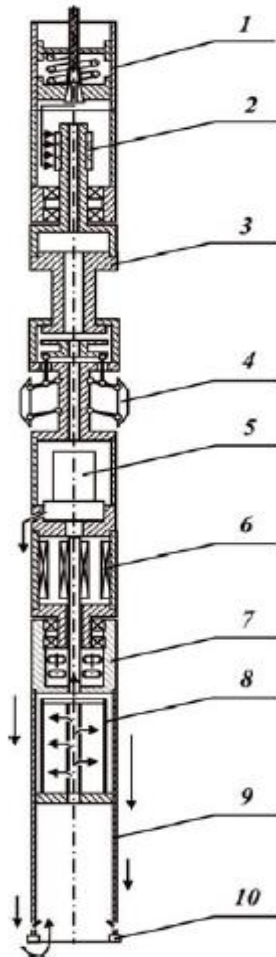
KEMS-112 Electromechanical Drill. 1: Cable termination 2: Electric chamber 3: Hammer block 4: Anti-torque system 5: Pump 6: Electric drive motor 7: Reducer 8: Chip chamber 9: Core barrel 10: Drill head (Vasiliev, et al, 2007).
